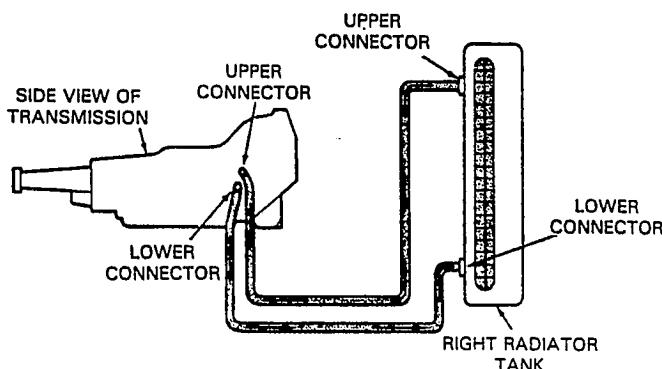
Method of cooling transmission oil. This side view shows oil cooler located in right-side radiator tank. (Cadillac)
